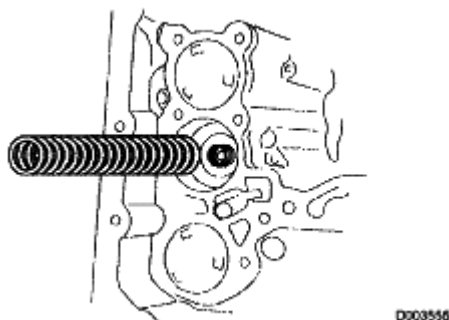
Identifying Spring And C-3 Accumulator Piston
